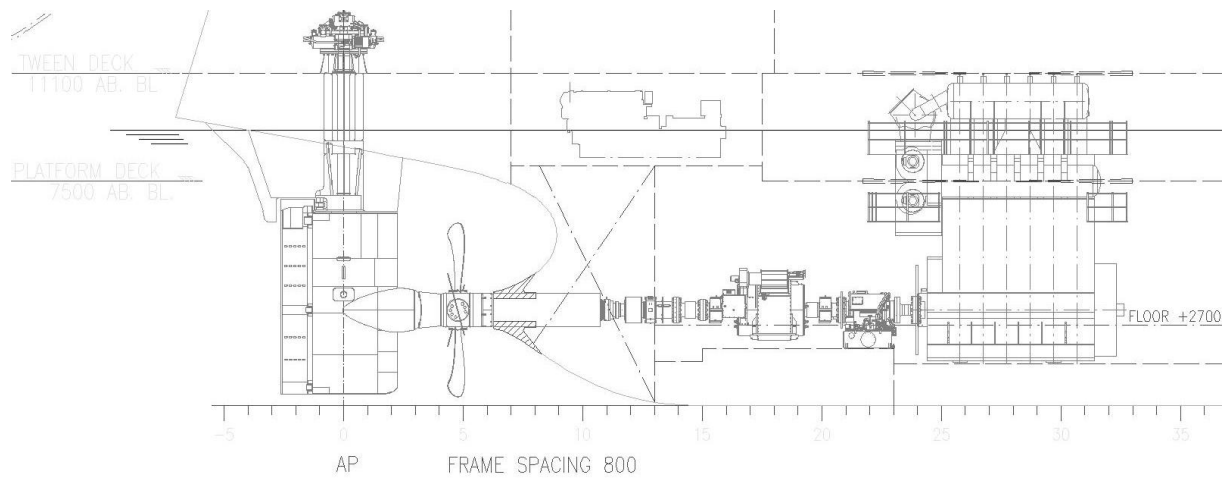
The propulsion layout of concept 2. From right, the MAN main engine (two-stroke), propeller shaft clutch, shaft generator, shaft, propeller. The auxiliary engine is seen above the propulsion line.
